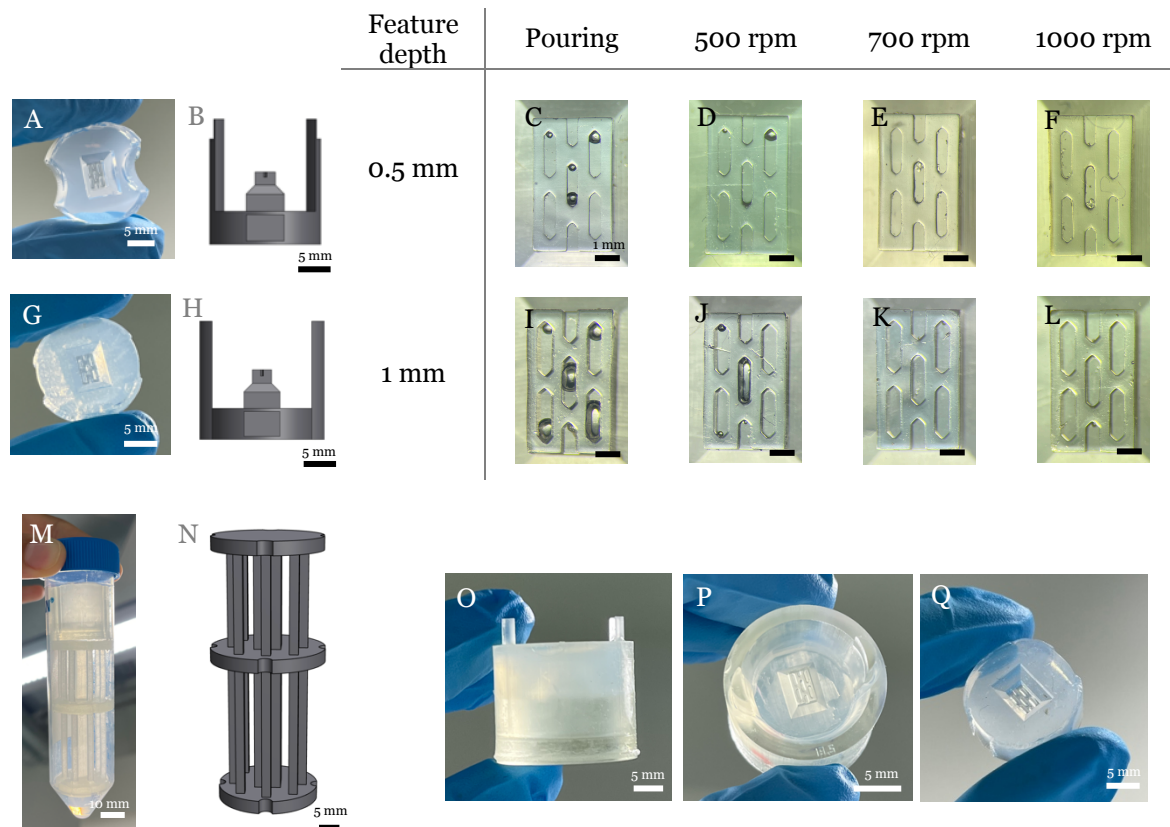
Quality of agarose casting for hole depth of 0.5 and 1 mm without (pouring) and with centrifuging at different rpm (500, 700 and 1000 rpm) (C to F and I to L). Mould design and agarose mould of hole depth of 0.5 mm (A and B) and for 1 mm depth (G and H). The holder (N) and the mould with holder assembled in a 50 mL falcon (M). The mould assembly from the side (O) and top including gelled agarose (P) and the agarose mould with a pillar height of 1 mm (Q).
